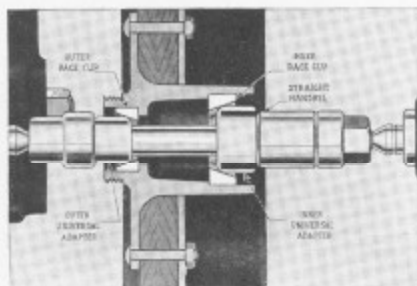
Wheel Assembly with Timken Races Mounted on Mandrel and Adapters.
